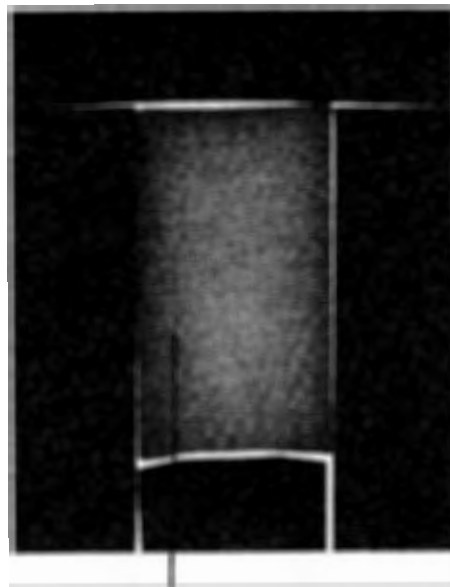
CUTTING SCHEME OF SPECIMEN N° 5
